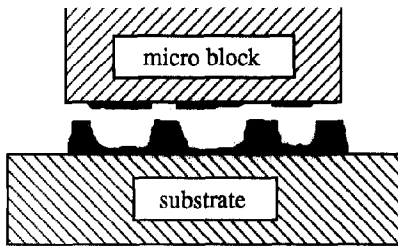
Schematic cross-sectional view showing how the fracture has propagated through the bond.
